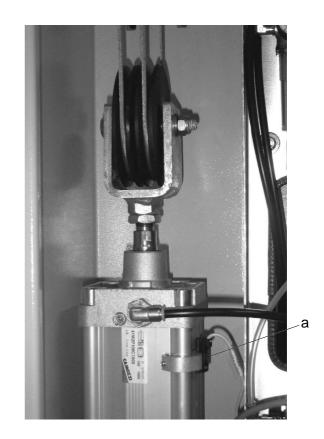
Pillar 2, below a Limit switch roof dryer down
